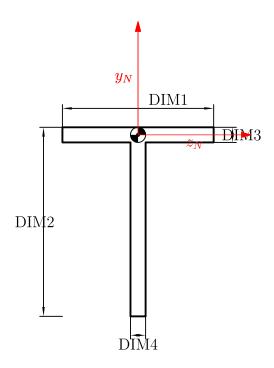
T: Cross section dimensions in a Nastran T profile section.
